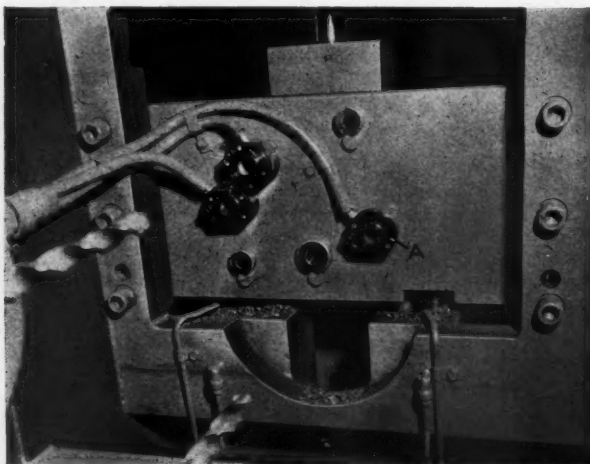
Application of three Detect-A-Tool sensing heads on the drill bush plate of a transfer machine
